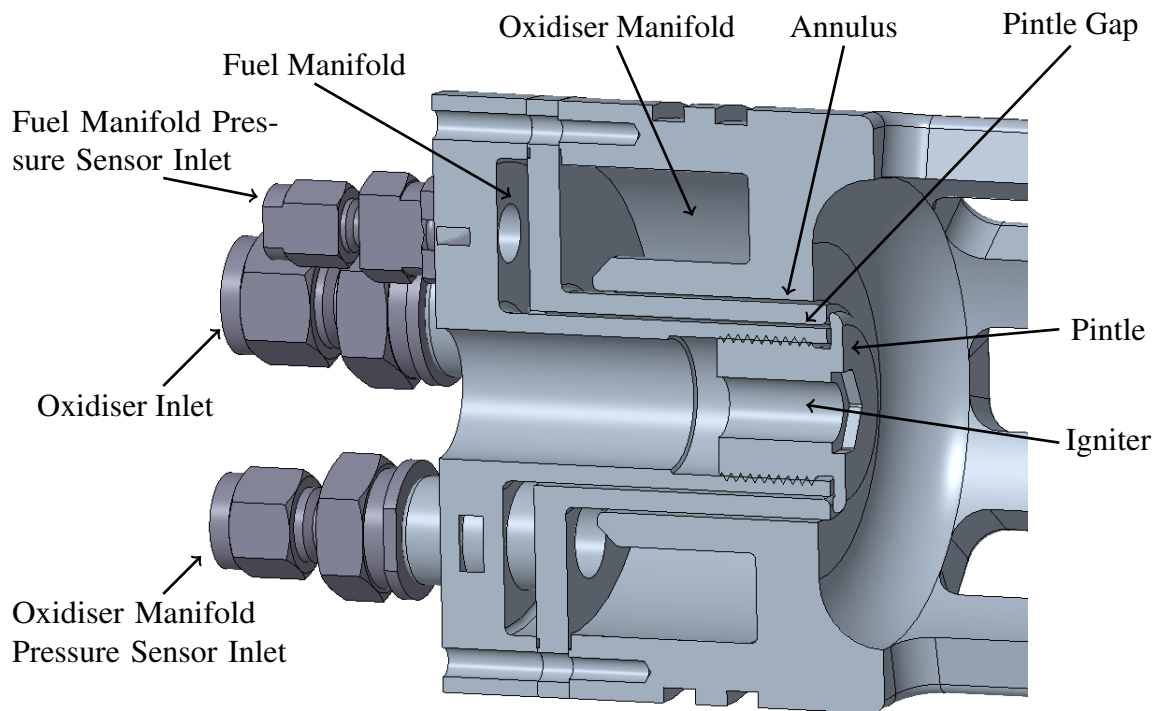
Ouroboros-2 pintle injector assembly CAD model.
